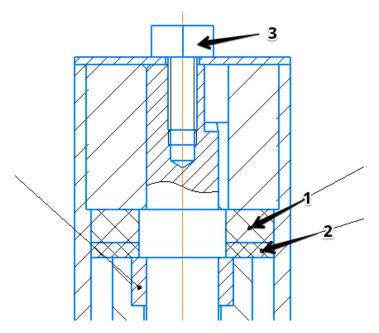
Mixer sealing rings: 1 – PTFE ring; 2 – Rubber sealing ring; 3 – Fixing screw bolt
